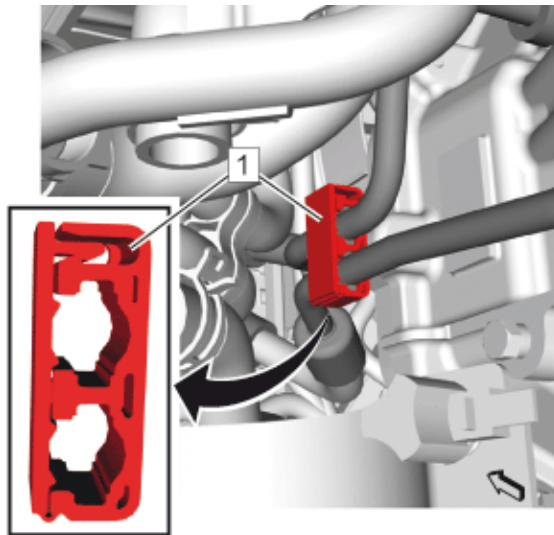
Transmission Fluid Cooler Inlet And Outlet Pipe Clip
